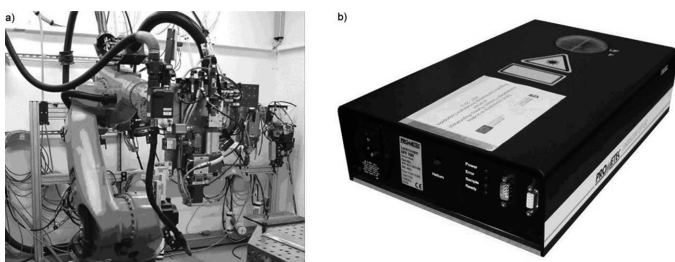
Laser welding station: a) laser disk TruDisk 12002 with D70 laser head mounted on the wrist of KUKA industrial robot and b) laser beam analyzer UFF100
